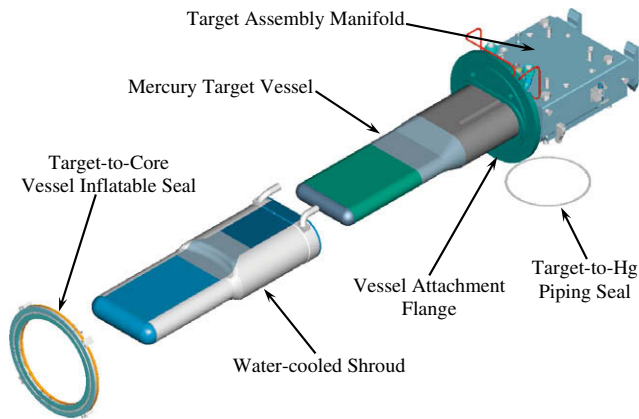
Exploded view of the water-cooled shroud, target vessel, and manifold assembly.
